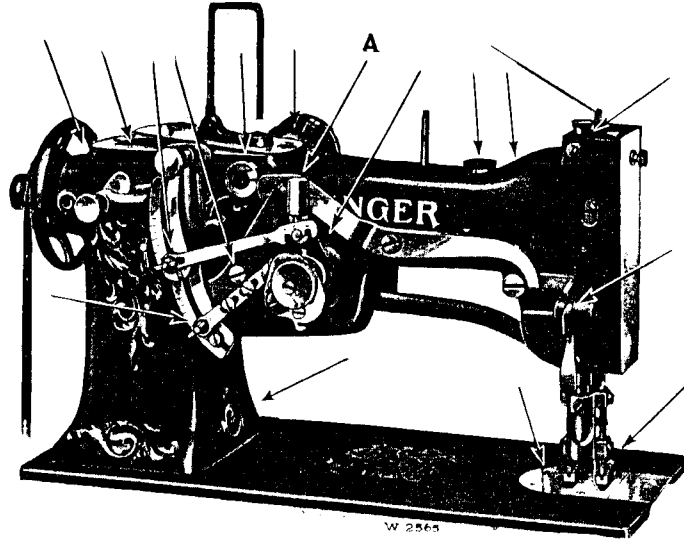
OILING POINTS AT THE BACK OF THE MACHINE
